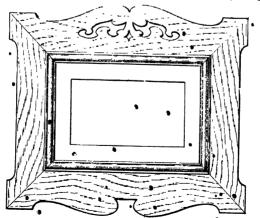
Front Elevation of Fretted Walnut Frame.
